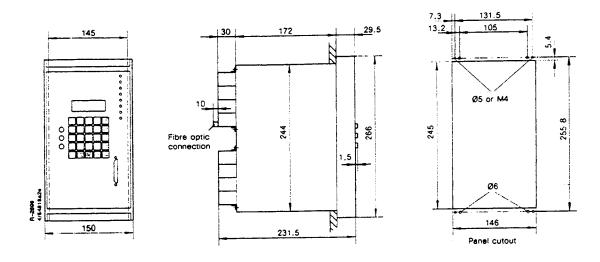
7SJ512 with housing 7XP2030-2 (for panel flush mounting/cubicle mounting)
